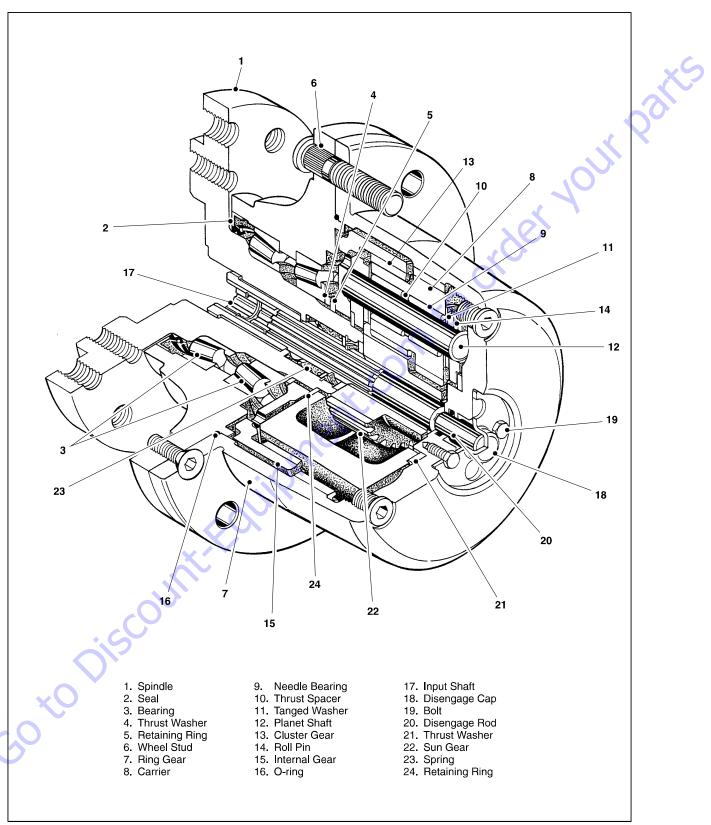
Torque Hub (Prior to S/N 39594) - Cutaway View
